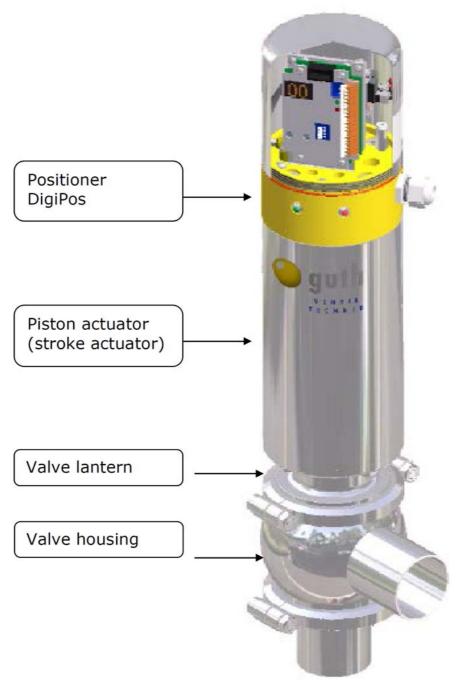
VSR modulating valve with piston actuator (stroke actuator) and DigiPos positioner
